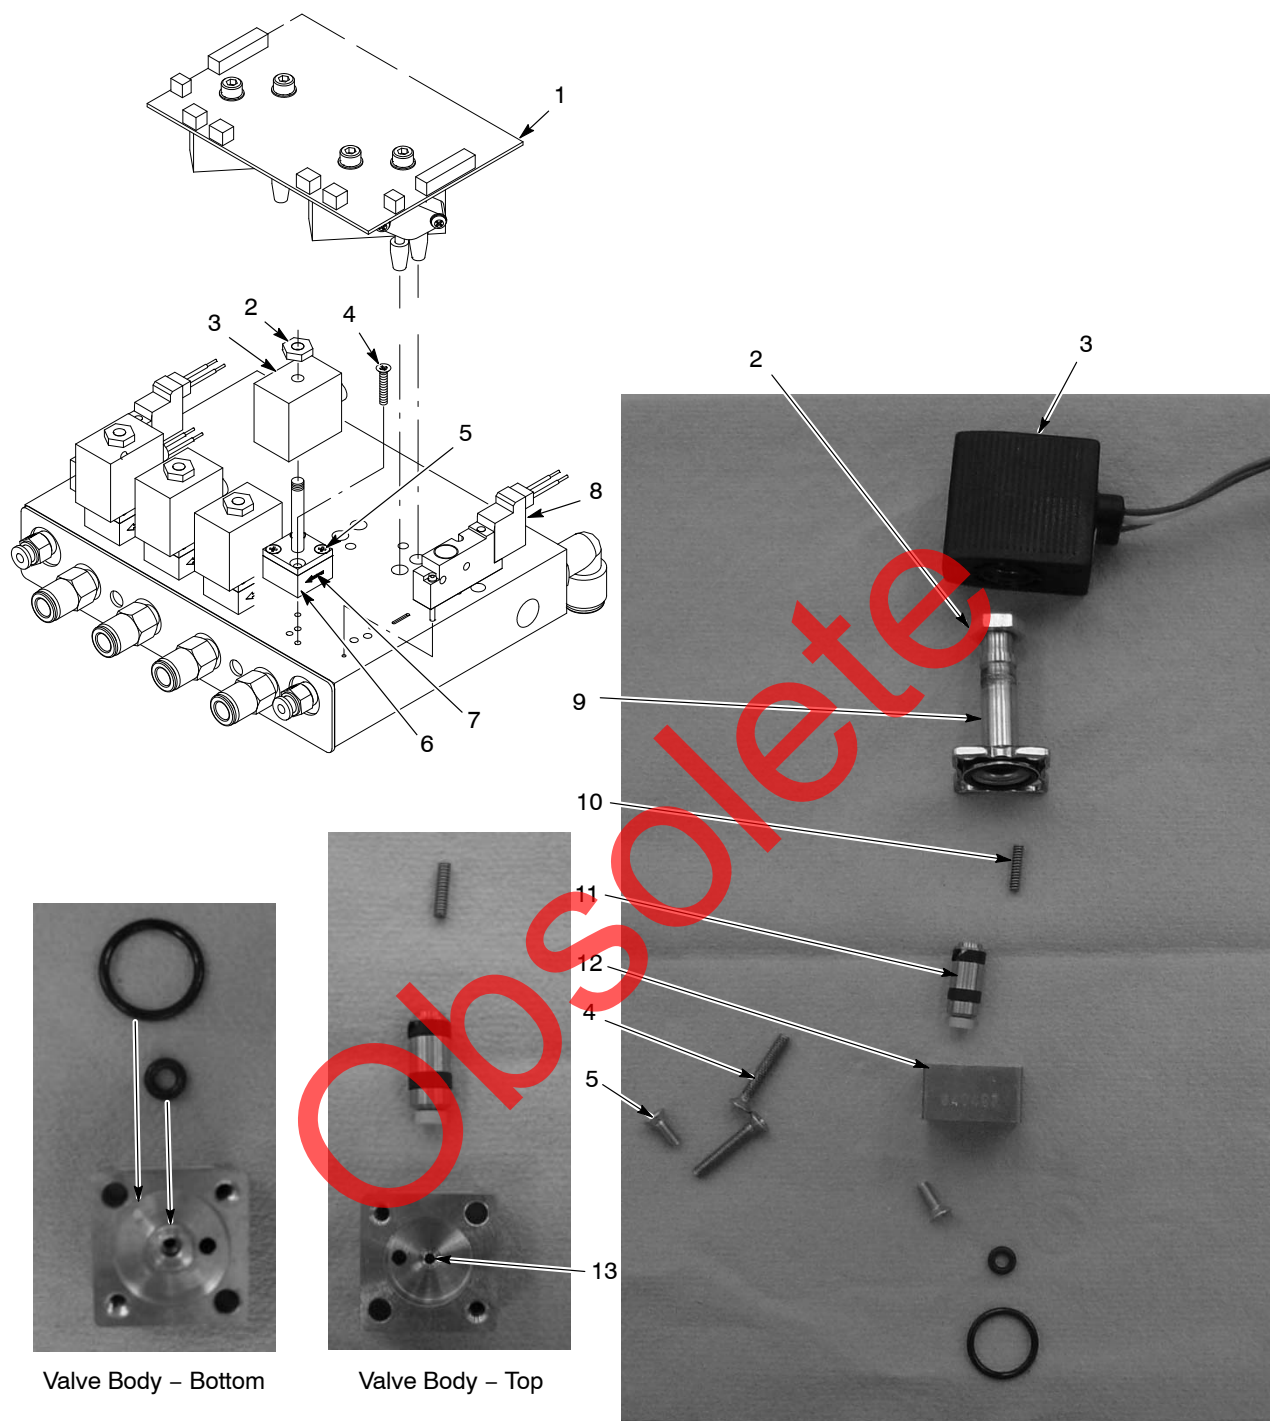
iFlow Module Proportional Valve Removal and Replacement
